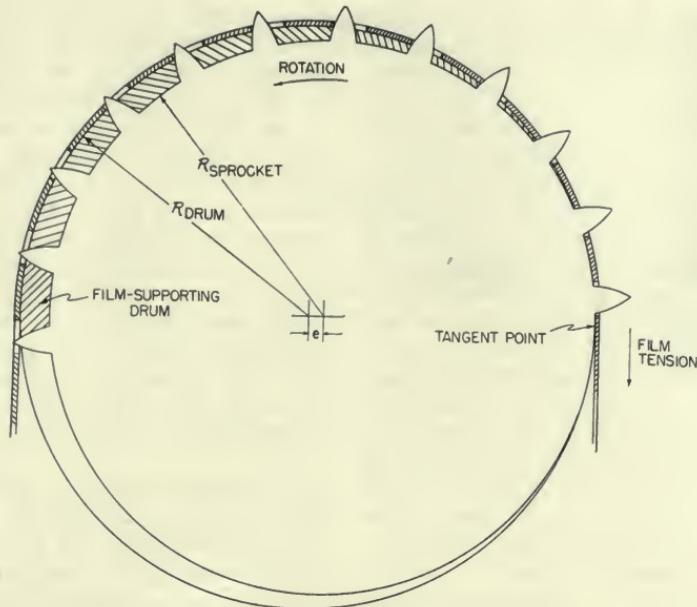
Variable-pitch, shrinkage-accommodating sprocket assembly.
